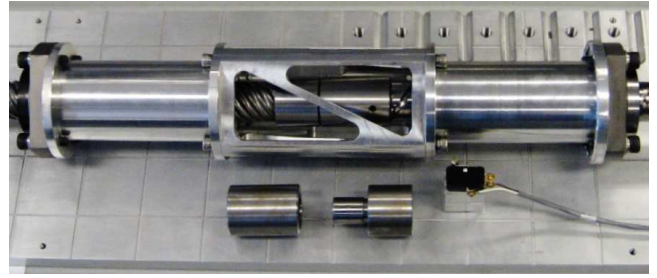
Close-up photograph of the C-drive, disassembled ballscrew coupling and limit switch
